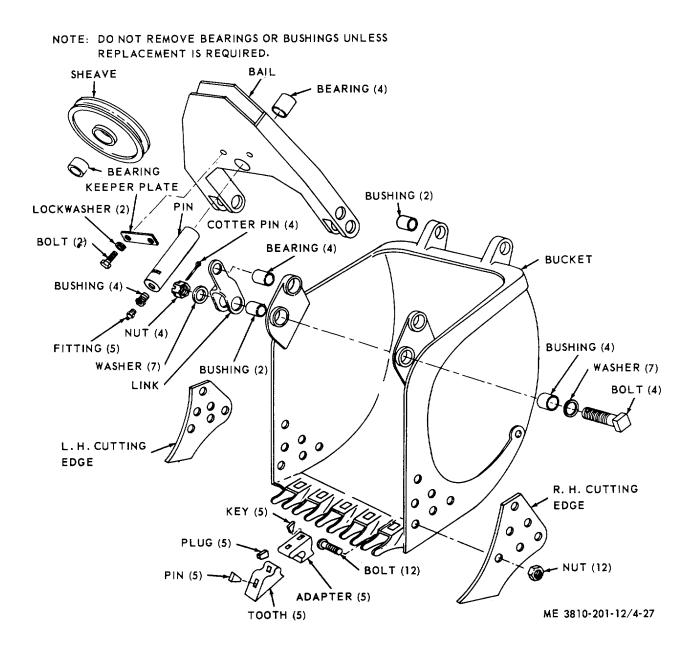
Backhoe bucket, disassembly and reassembly.
